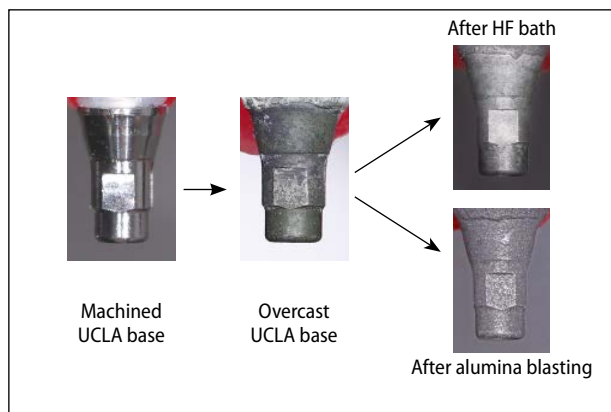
Surface morphology of the machined surface and the overcast surface with the oxide layer and after acid bathing or alumina blasting for oxide layer removal.
